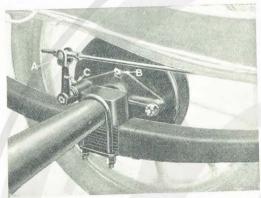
LEFT END OF THE REAR AXLE OF THE 14 H.P. "STANDARD."
